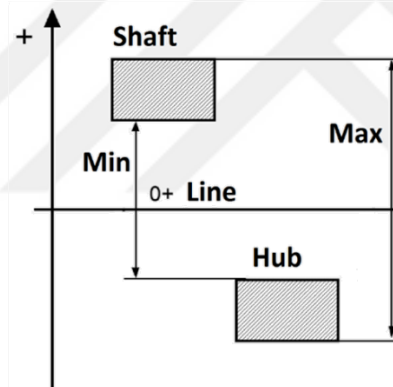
Press fit shaft and hub size with tolerance (Temiz, n.d.)
